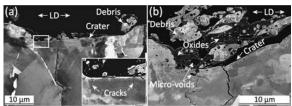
Secondary cracks created in the fatigue of the EDM specimens.
